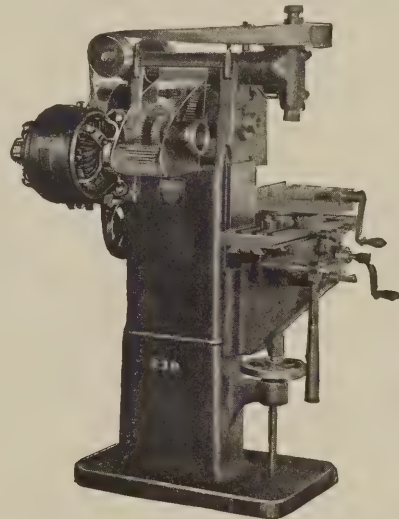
Chicago Milling Machine. Roth-Motor Driven.
